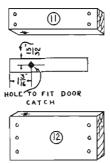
Front Cross Rails ber 3 which is the bottom board, should be cut off so the corners will not come in contact with the splines. This operation can be done on the circular saw by setting the miter gage for 45 degrees and sawing off the two front corners as shown in Figure 482.
